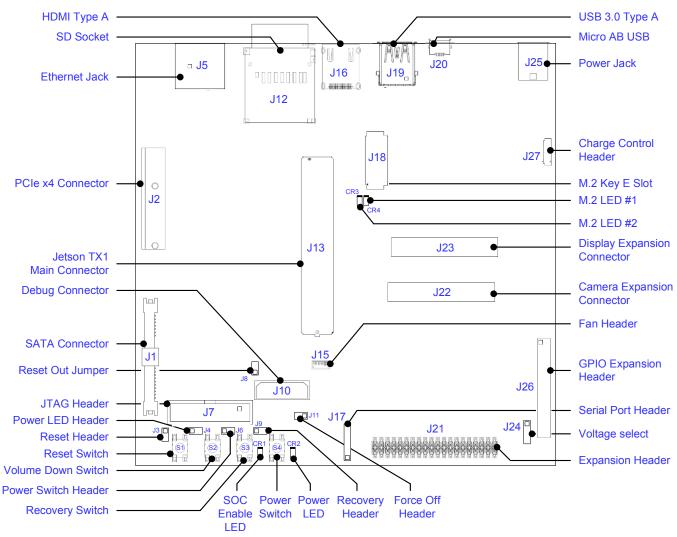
Jetson TX1 Carrier Board Placement (Top View)
